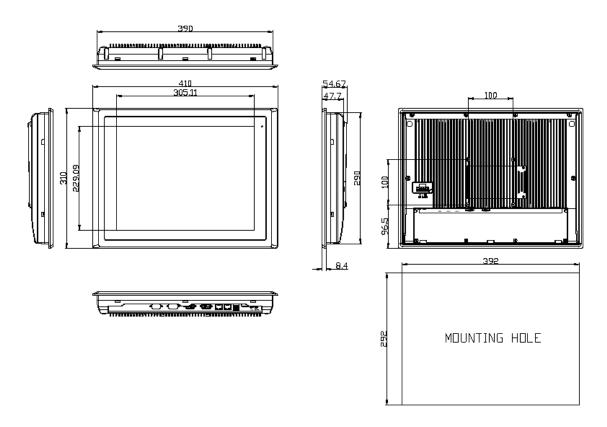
Dimensions of TP-3445-15AP/AR/AG(H)
